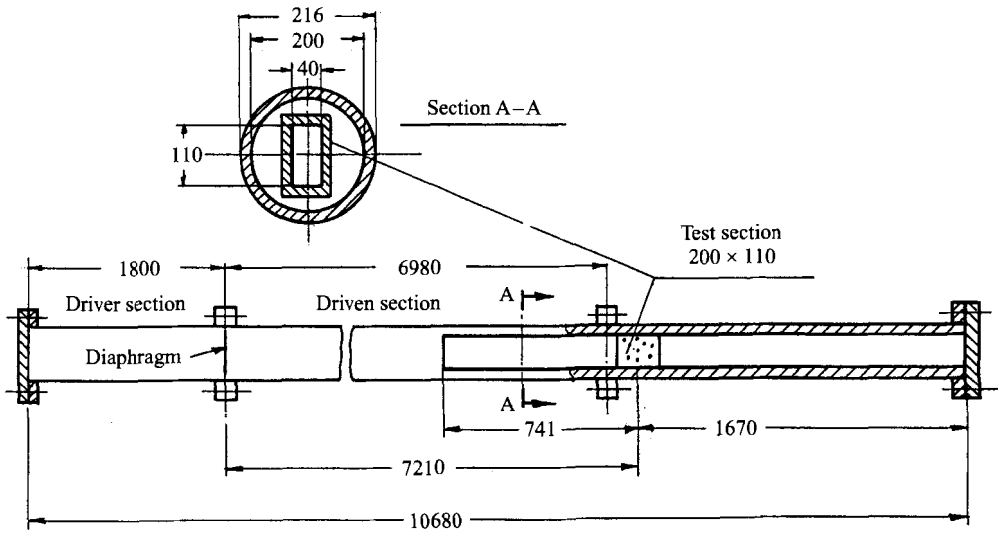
Illustration of the shock tube used for the experimental investigations. Dimensions in mm.
